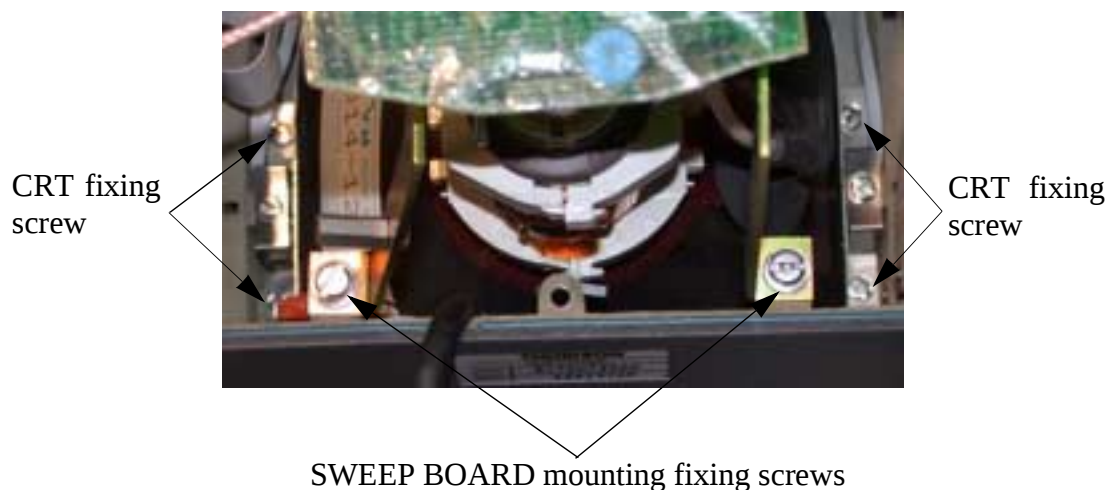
SWEEP BOARD mounting and CRT fixing screws
